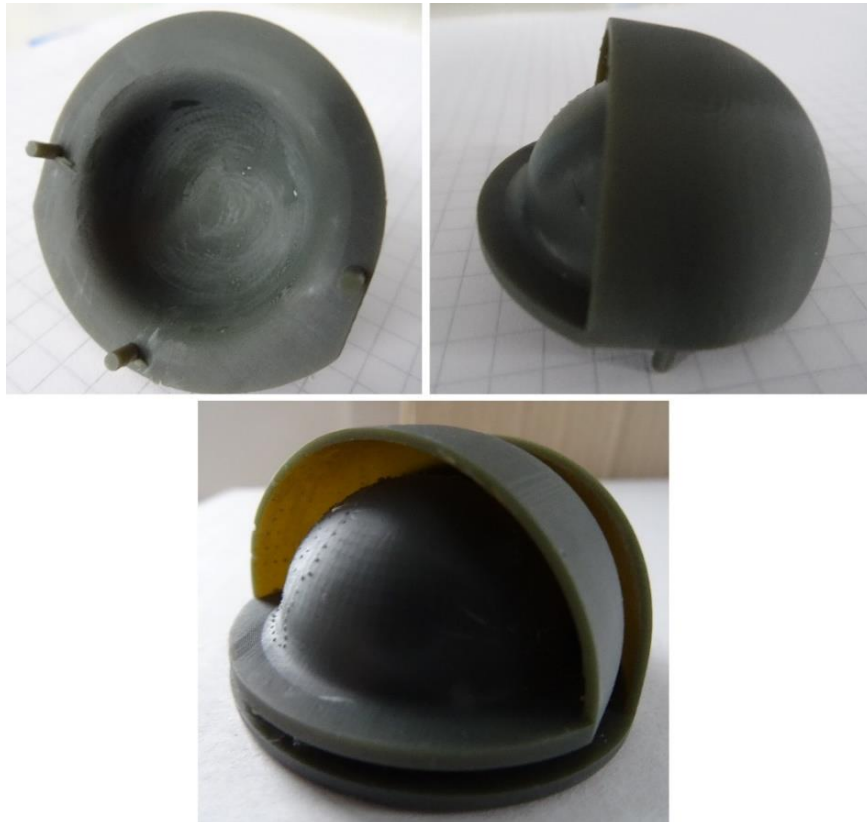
Photos of finished sparger pieces and assembly (iteration #5)
